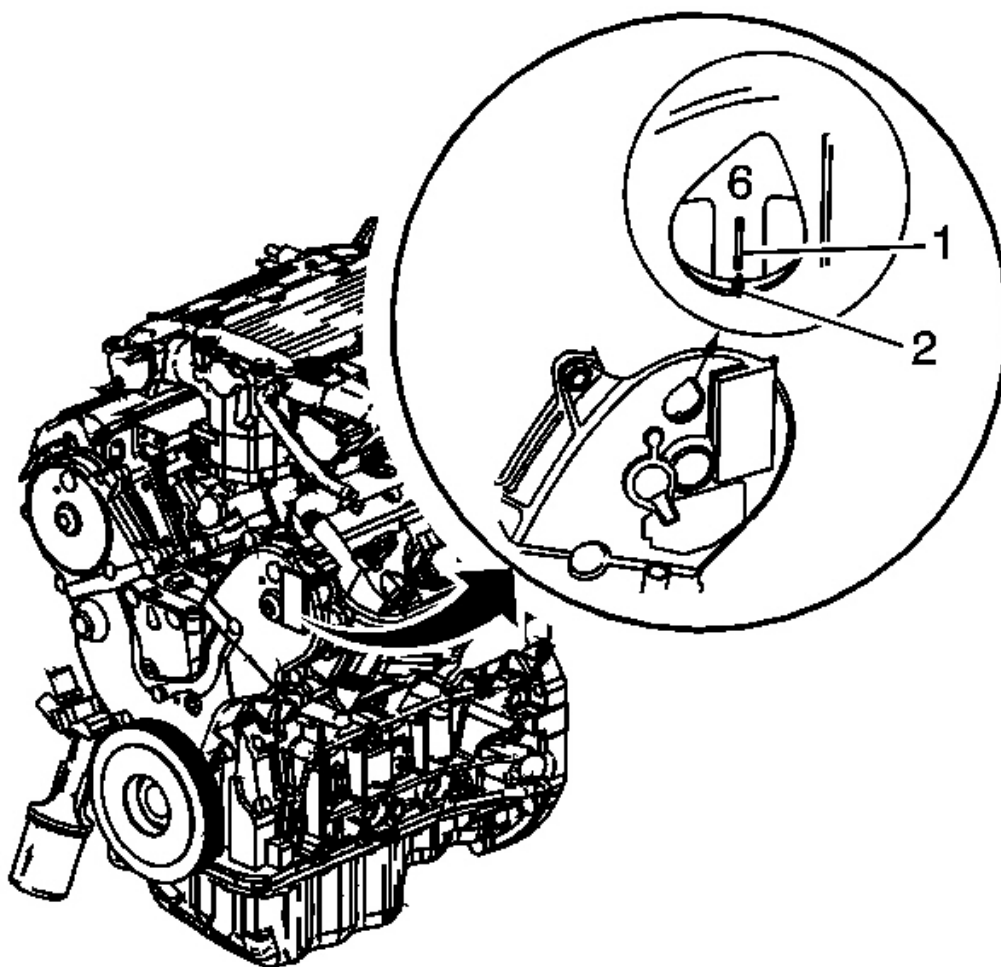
View Of The Adjusting Cylinder Number 6 Valve Clearance
